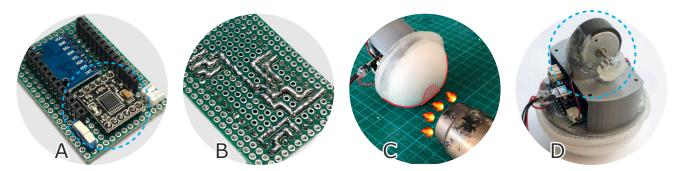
Fabricating process; DRV8833 Figure 21A, dual-channel motor driver is used to replaced Figure 20A; Using hot gun to create flat bottom Figure 21C; Using hot gun glue to add weight on motors
